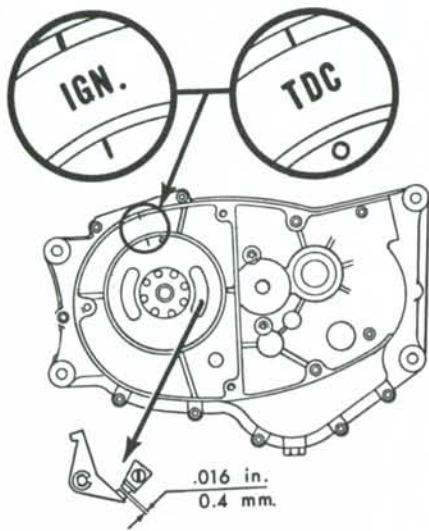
When notch on flywheel is aligned with notch on crankcase, crankshaft is positioned for correct ignition point. When "O" on flywheel is aligned with notch in crankcase, piston is at TDC.
